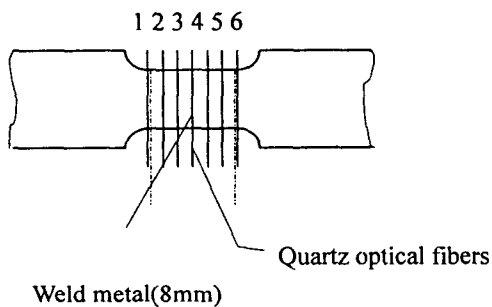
HK-40 cross-weld specimen and stuck fibers
